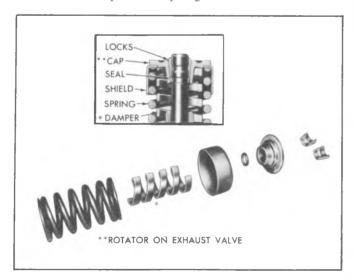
A-27V--Valve Spring Installation (Small V-8)
